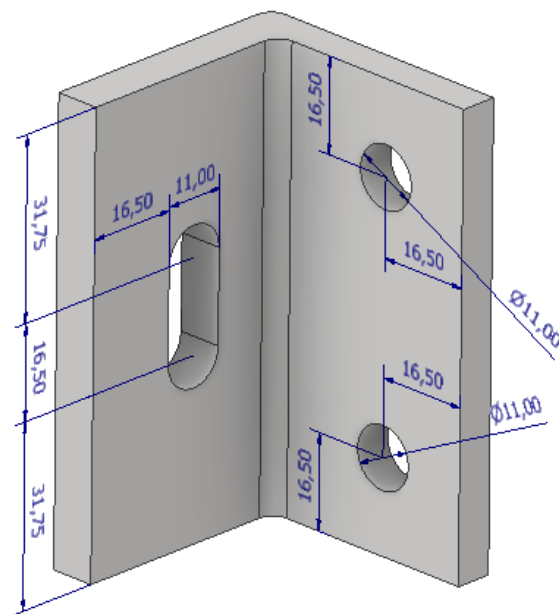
Bolt hole placement and extrusion length for small wind L-profile. All bolts are size M10.
